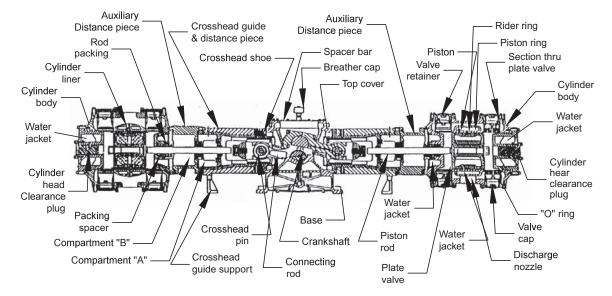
Cross-section of a high-speed separable reciprocating compressor.
